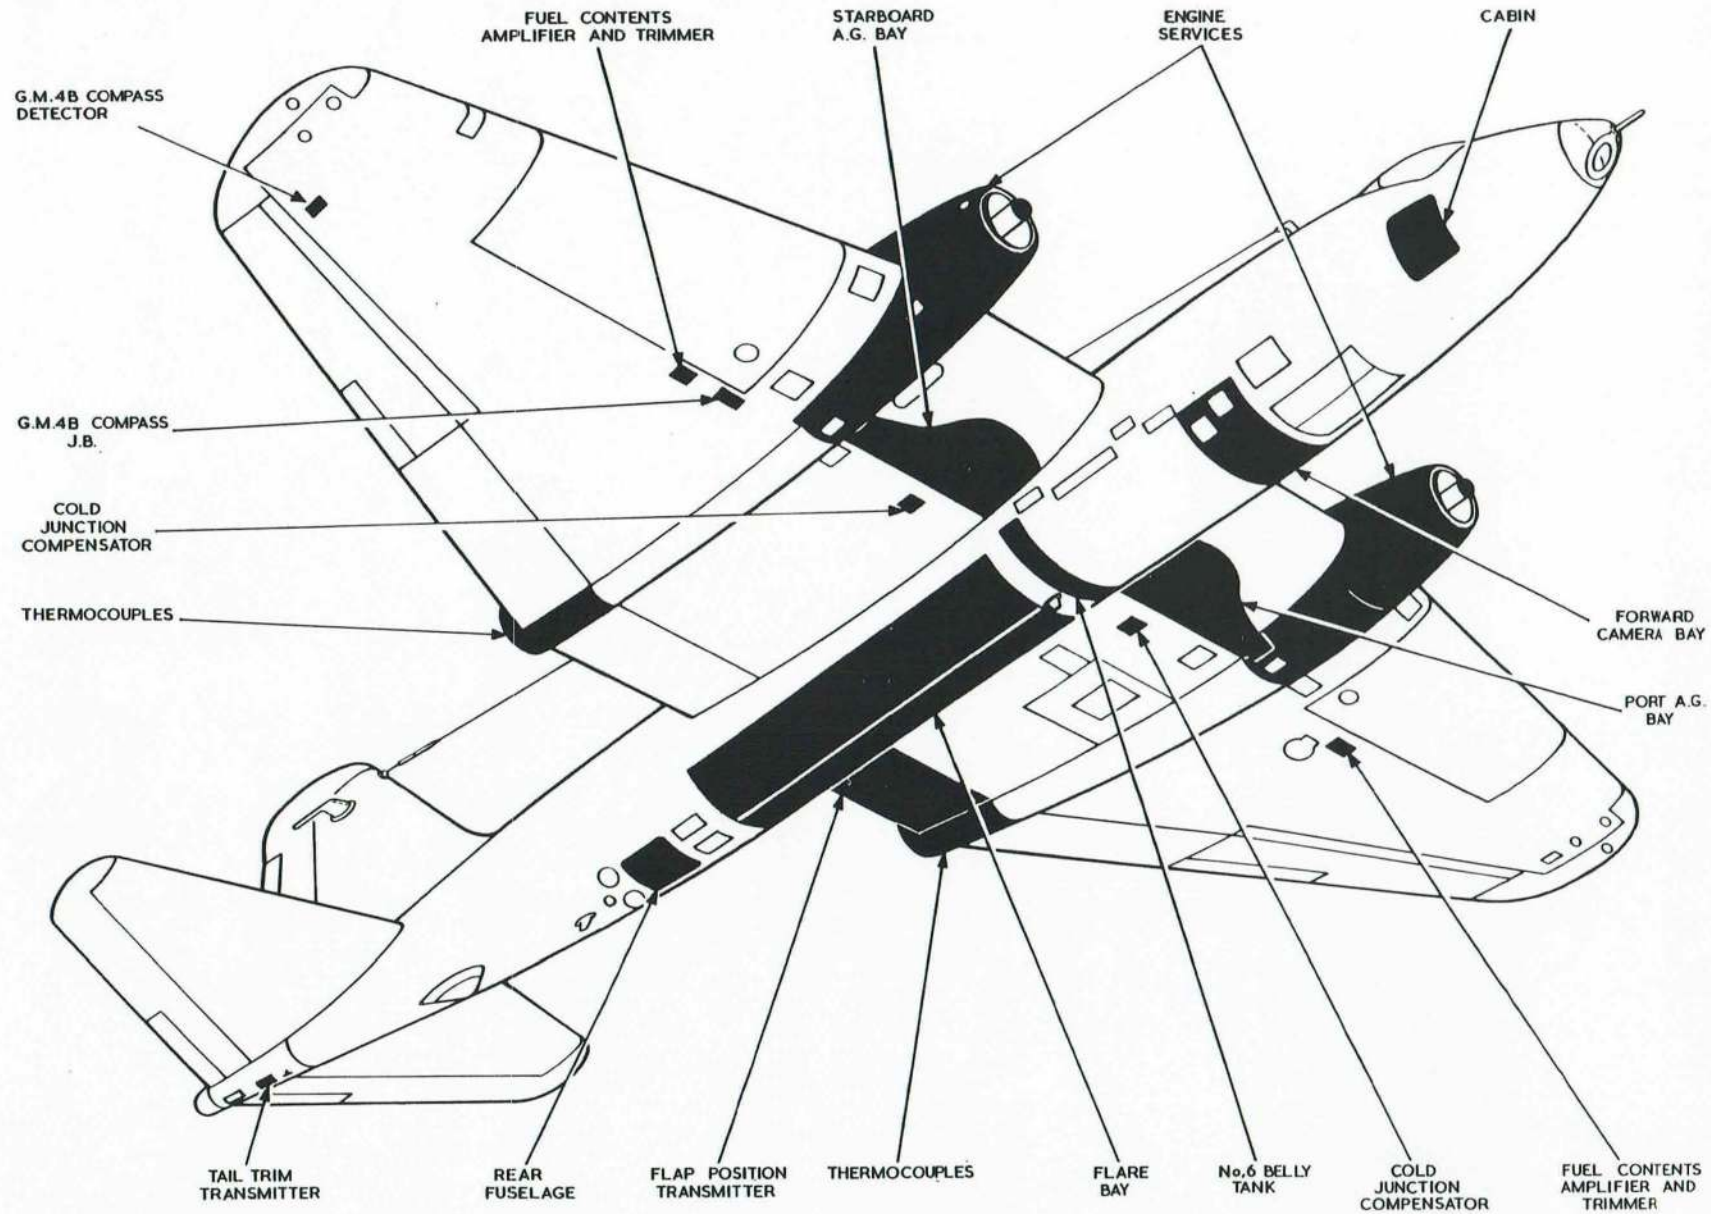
ACCESS PANELS, LOWER SURFACE AND STARBOARD SIDE
